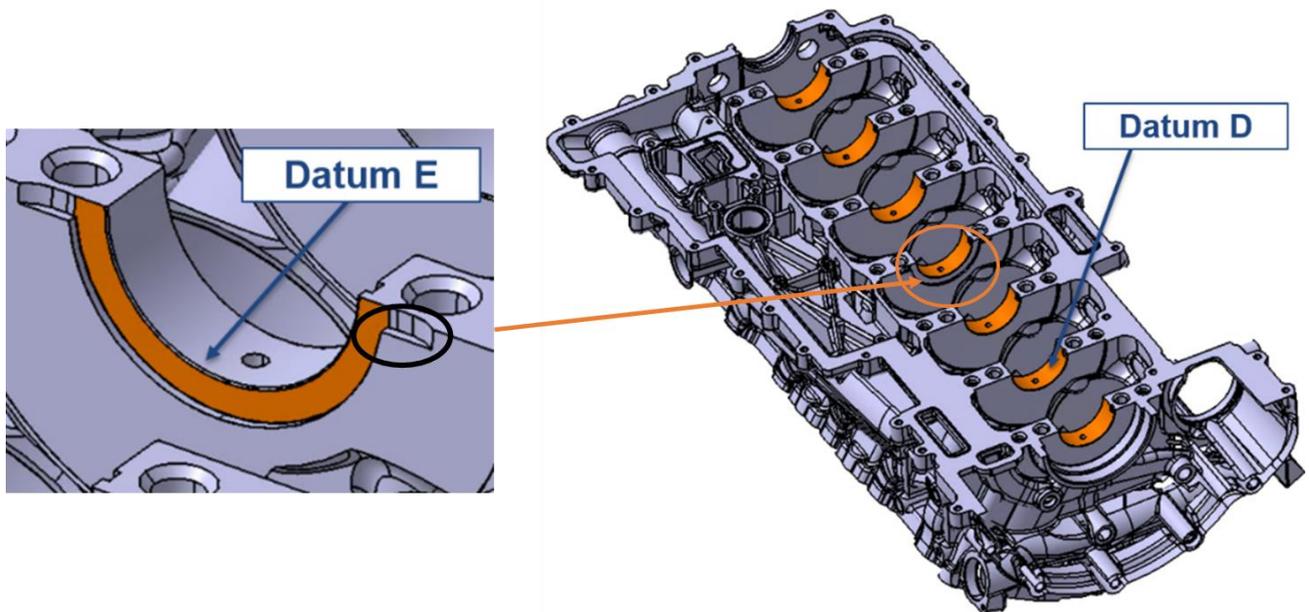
Engine block DRFs: Datum D and Datum E
